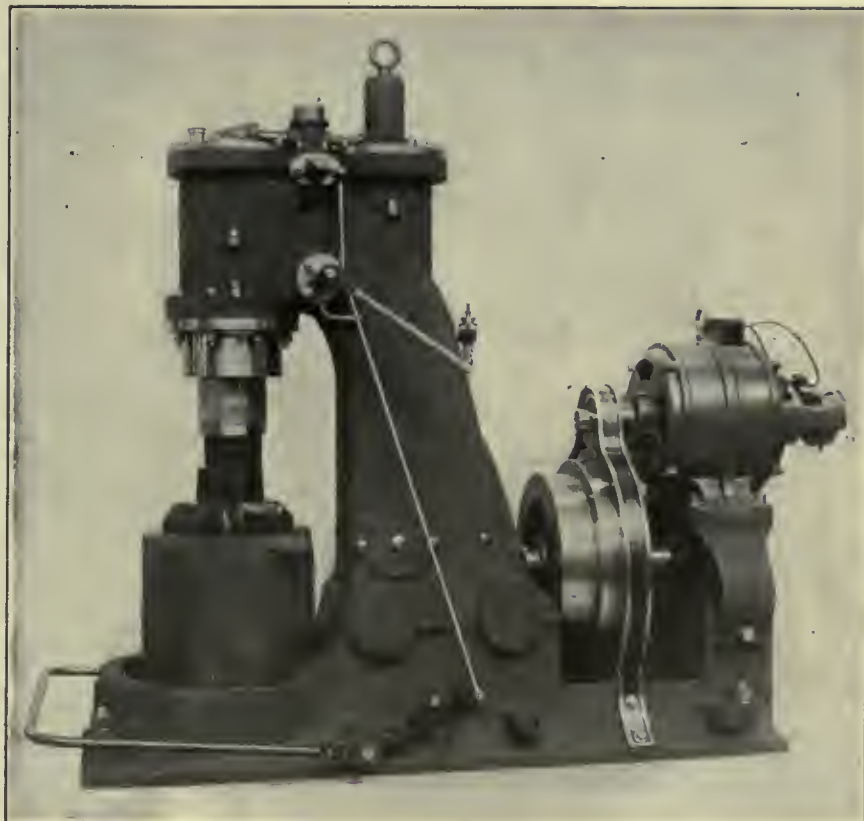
BEECHE MOTOR DRIVEN AIR HAMMER.
